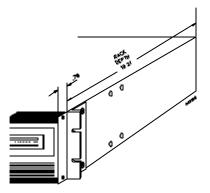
NXE1-20 Typical Rack Mount Bracket Installation
